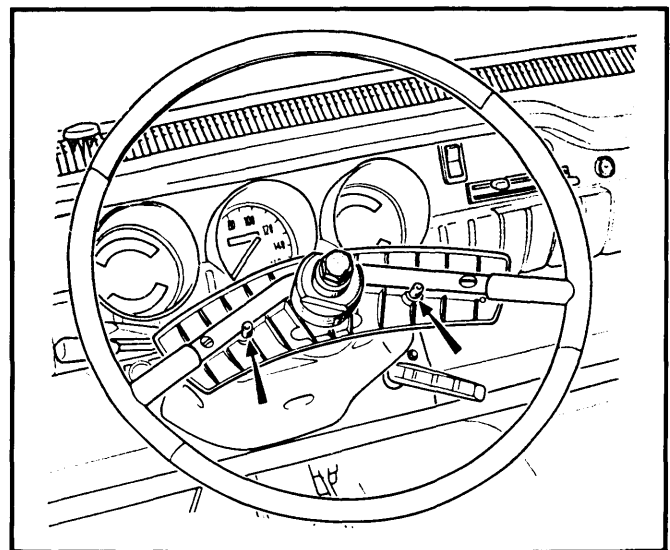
Top View of Steering Wheel with Detail of Horn Pad Mounting Pins
